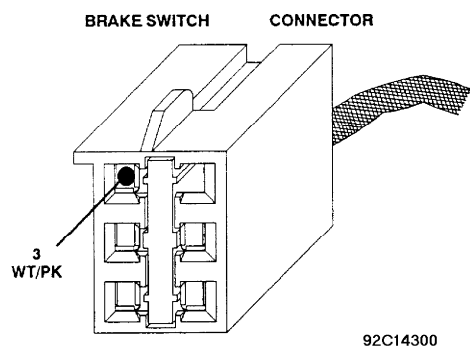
Test 8A - View of Brake Switch Connector (Cavity 3)
